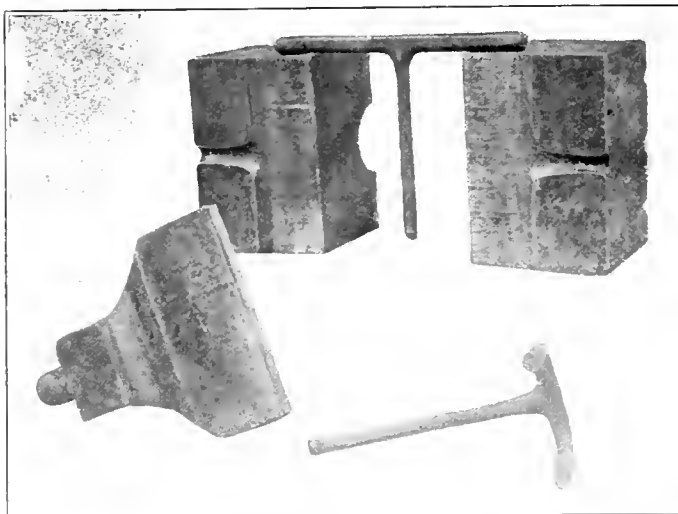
DIES AND HEADER FOR WELDING END ON CLINKER HOOK.
